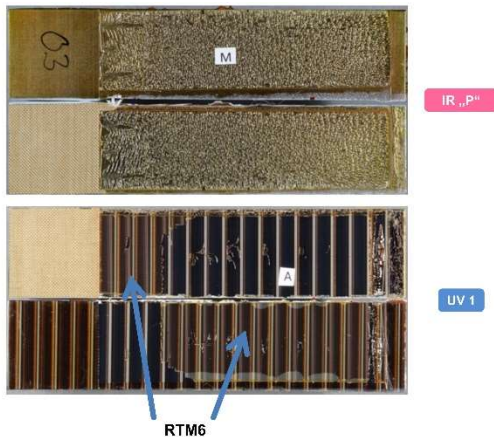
Fracture surface after DCB testing for IR and UV laser treatment after 2500 h of ageing.
